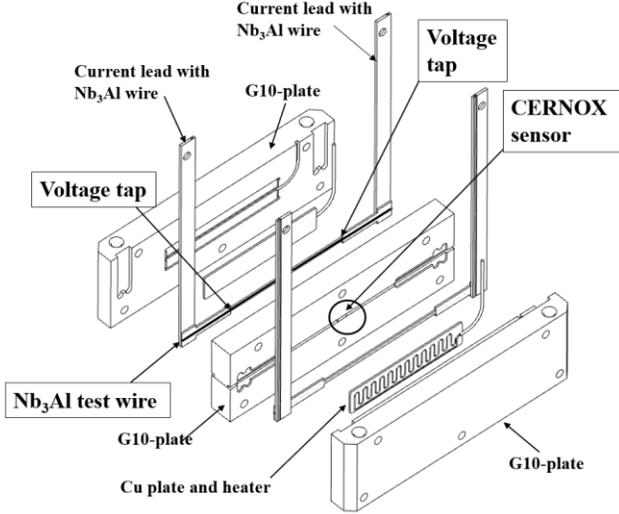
Assembly of Nb₃Al cable sample test holder.
